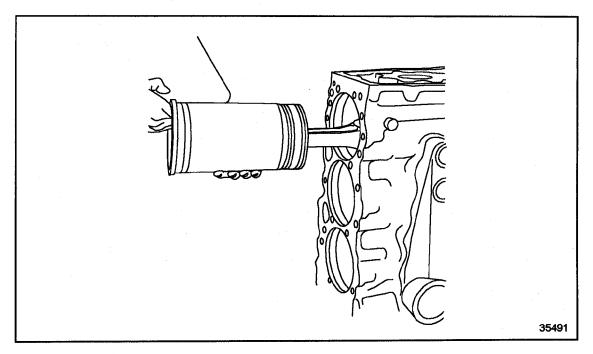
Installation of Liner, Piston and Rod Assembly into Engine Block
